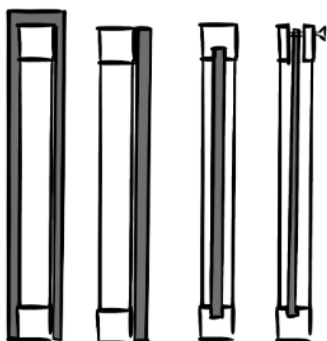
Side view of possible paper to frame connections. Paper is colored in dark gray.
